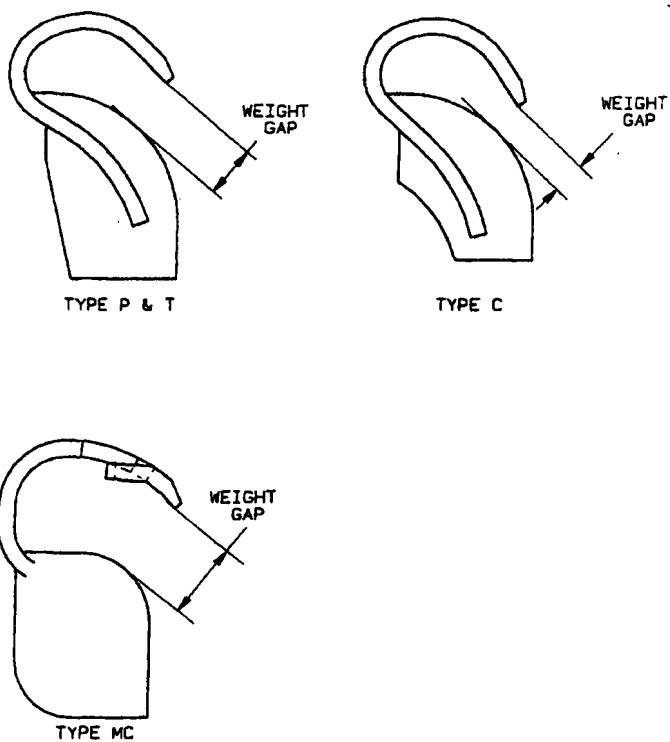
MACHINED ALUMINUM WHEEL RIM FLANGE TERMINOLOGY
